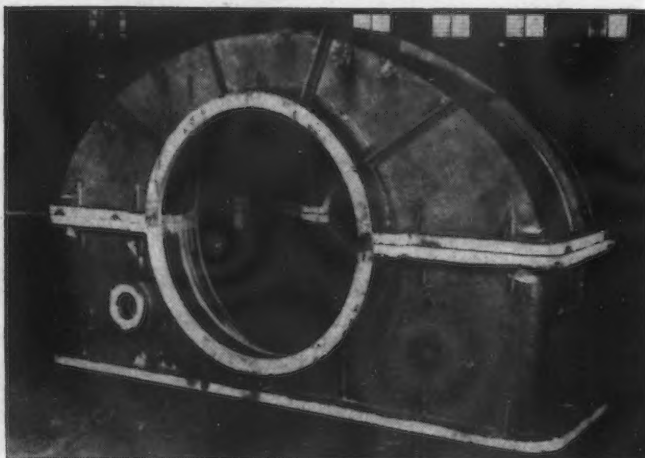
Completed 16-cylinder diesel crankcase, fabricated of welded steel construction by Lukenweld, Inc.
